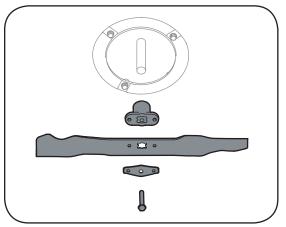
Remove the bolt, support, blade, and adapter to access the blade and underside components.
